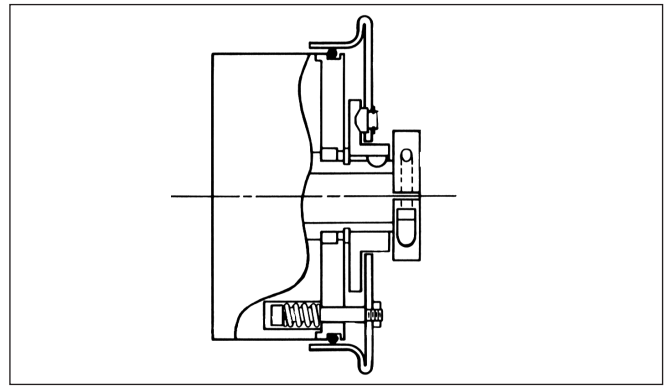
SWITCH ACTUATING PLATE ASSEMBLY
